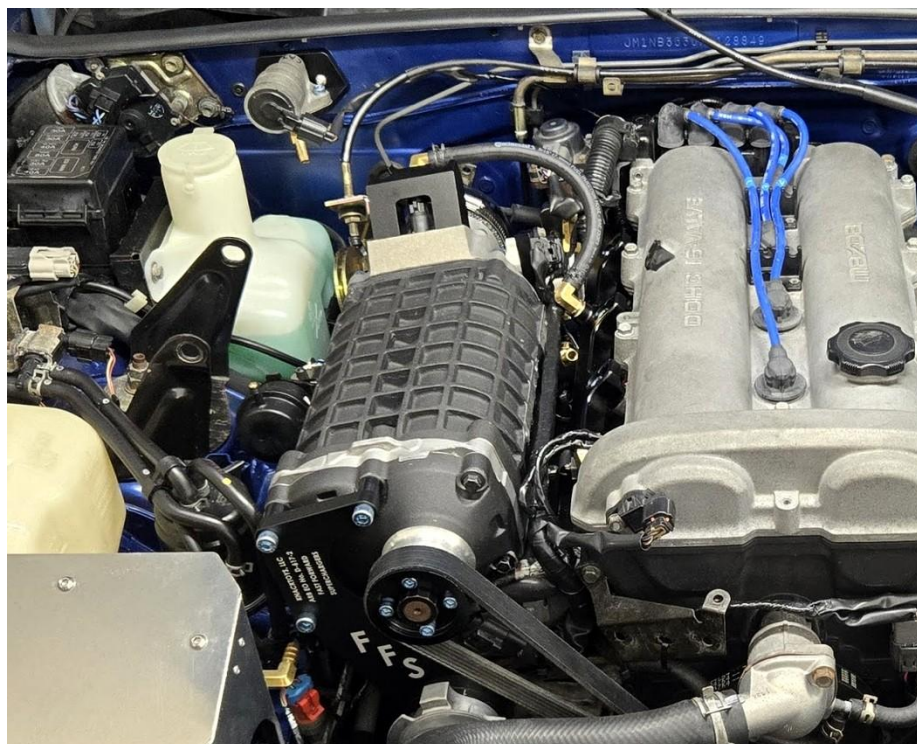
Completed E-Cool fuel-hose route from the center rail fitting to the E-Cool injector.
